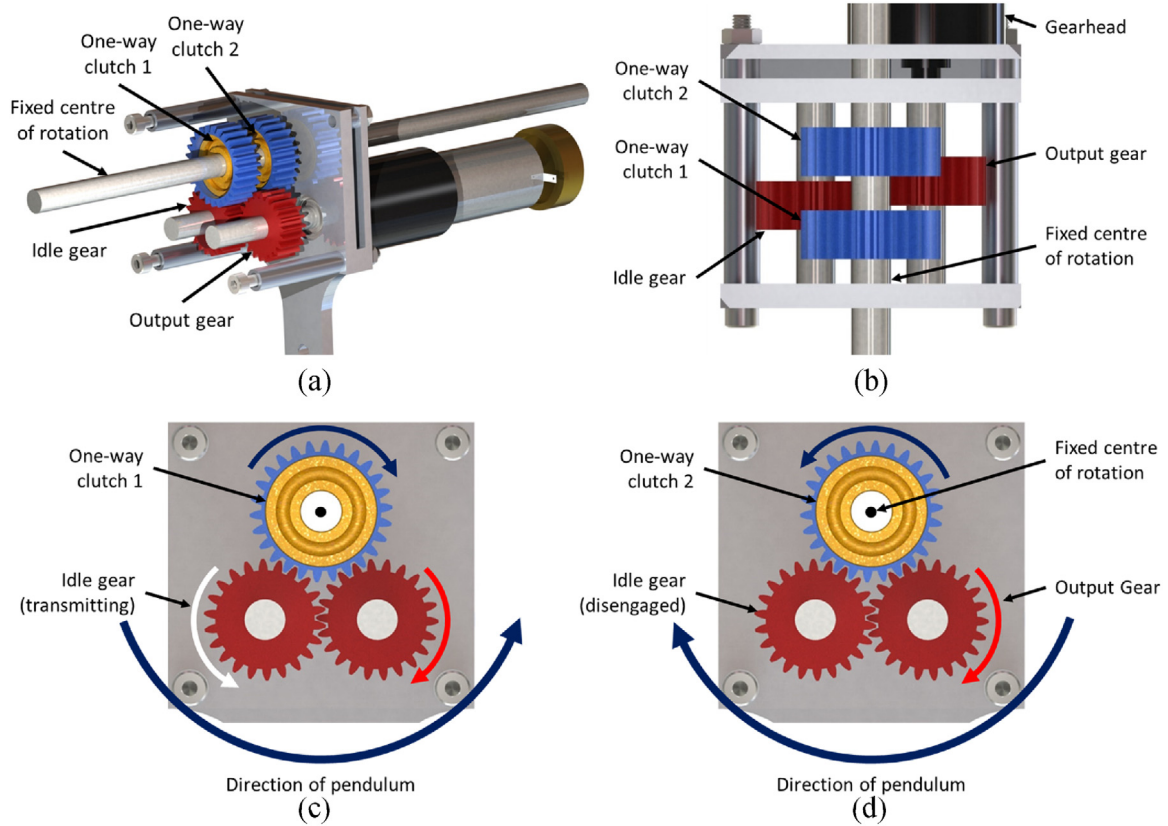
CAD model demonstrating working mechanism of the pendulum energy harvester during operation: (a) 3D cut-away view of gearing assembly, (b) Top-down view of gearing, demonstrating spur gear offsets, (c) End view of gearing during anticlockwise direction of pendulum, and (d) End view of gearing during clockwise direction of pendulum.
